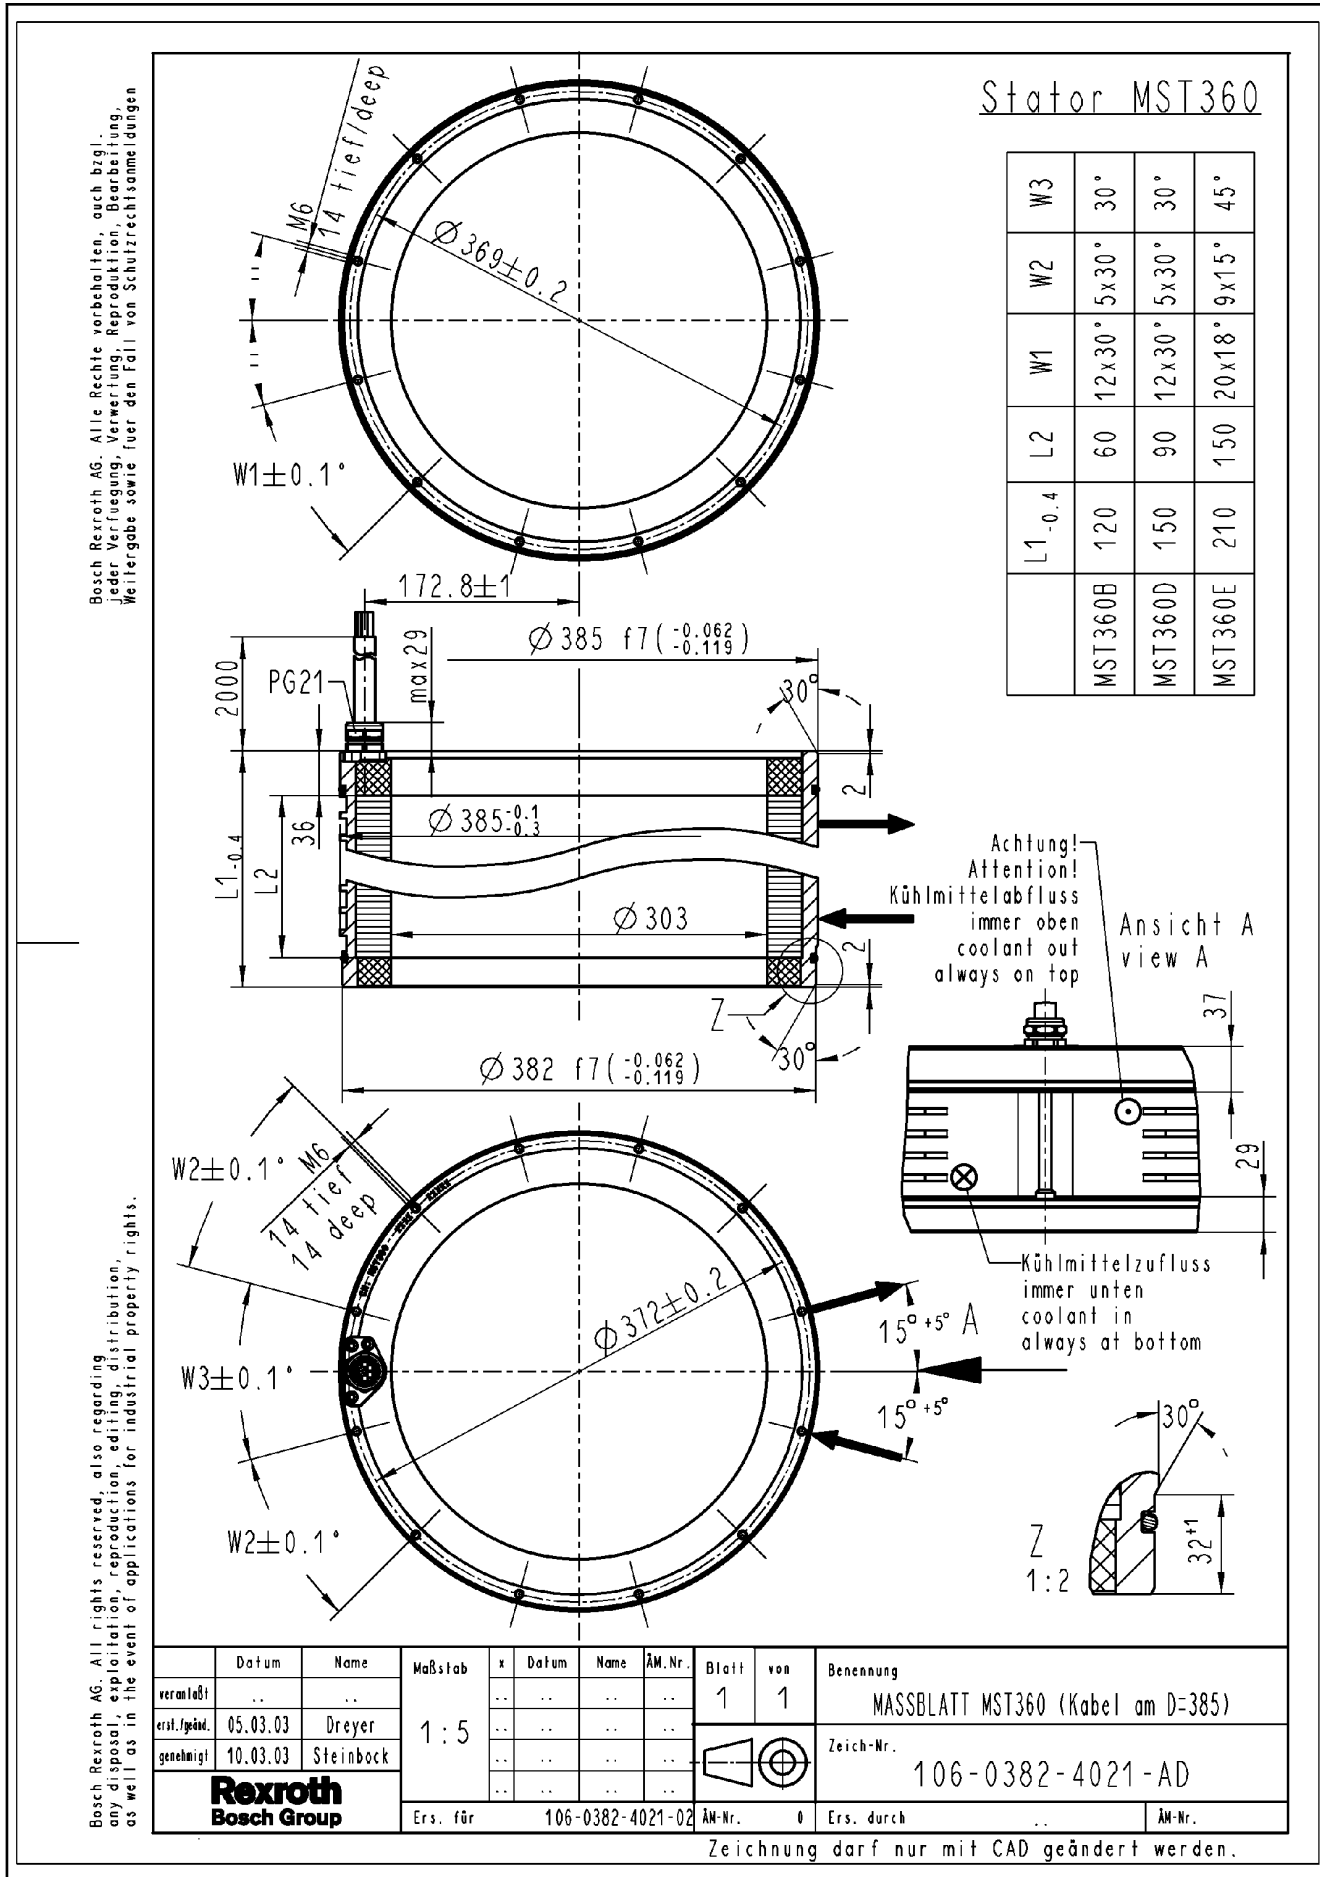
Dimension sheet for stator MST360, electrical connection "CN"
